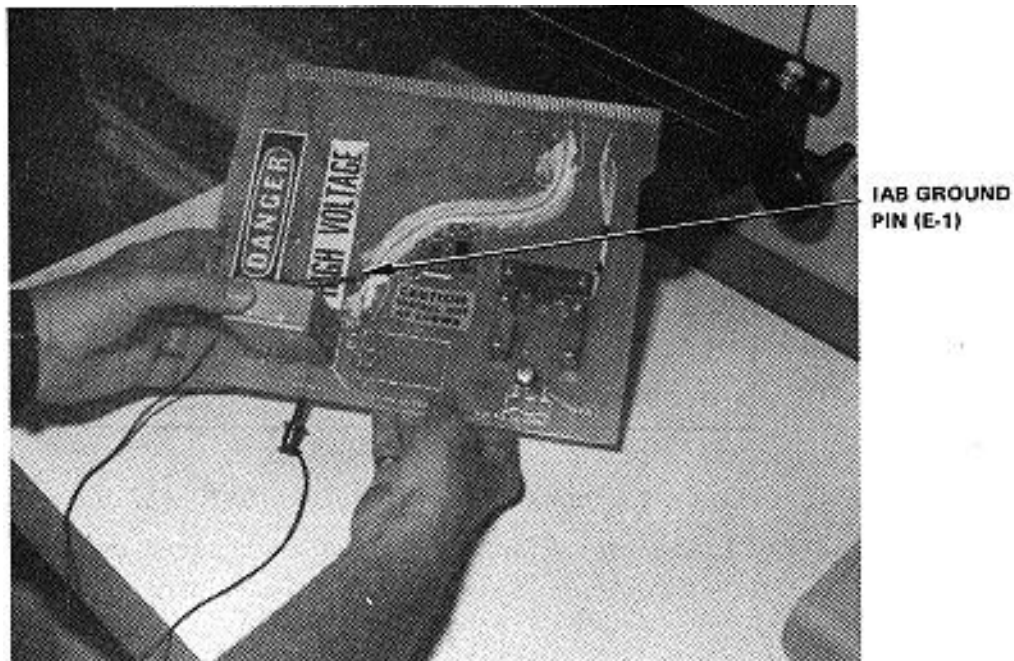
Connecting the Oscillator, Audio Frequency (10KC) PCB/Module to the IAB
